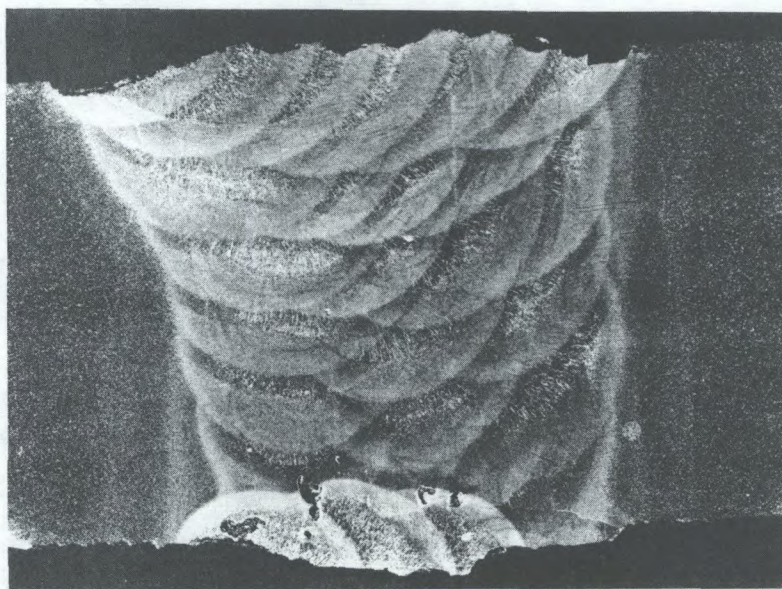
Section from longitudinal weld in the hull. The lower edge of the weld when located on the ship is at the right and the sea-water side is at the top. Mag. X2.
